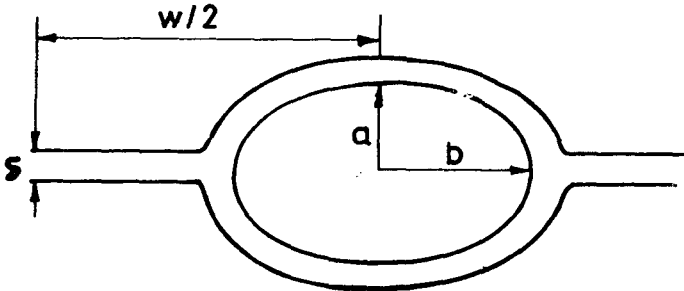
Shape and dimensions of tube (a= 4.75mm, b = 5.85mm, w = 20.2mm, $\delta = 1.1$ mm)
